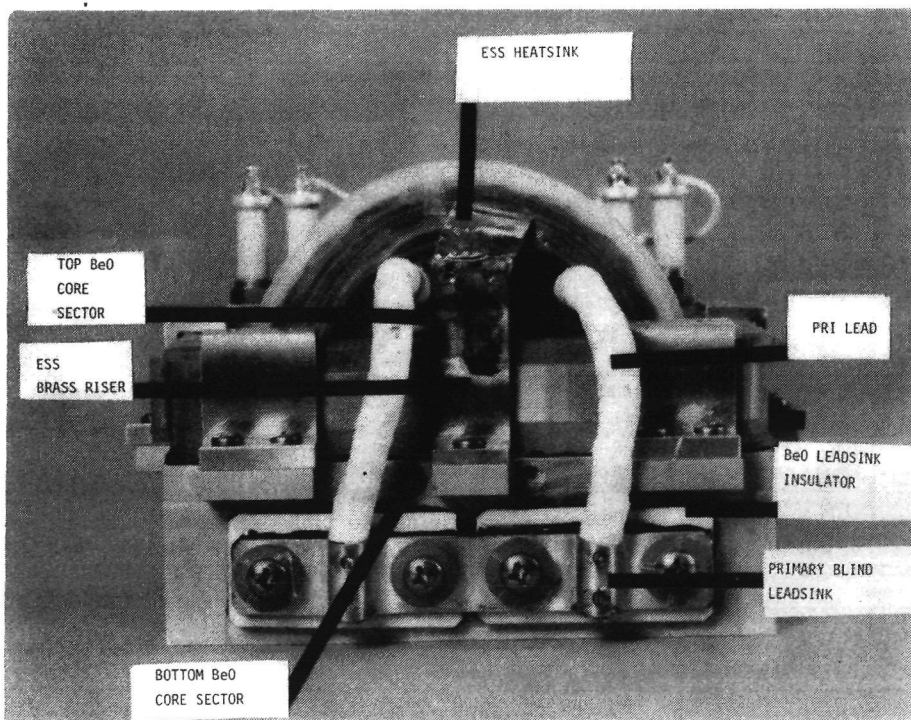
SCREEN TRANSFORMER, REAR VIEW
